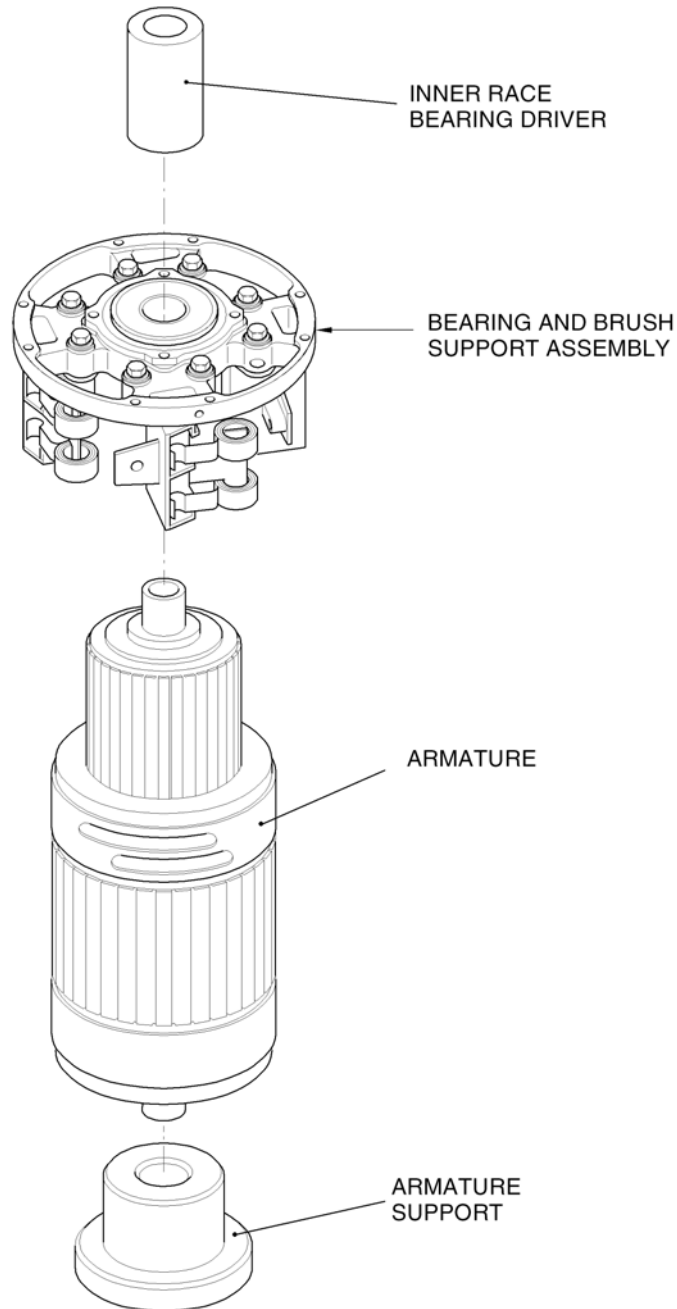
Attaching Bearing and Brush Support Assembly and Armature
